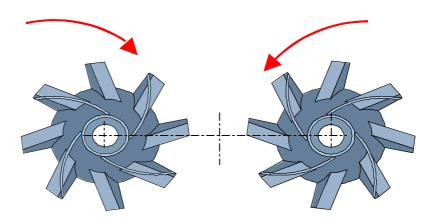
The rotors' direction of rotation in a pulper with two rotors (STOA009544)
